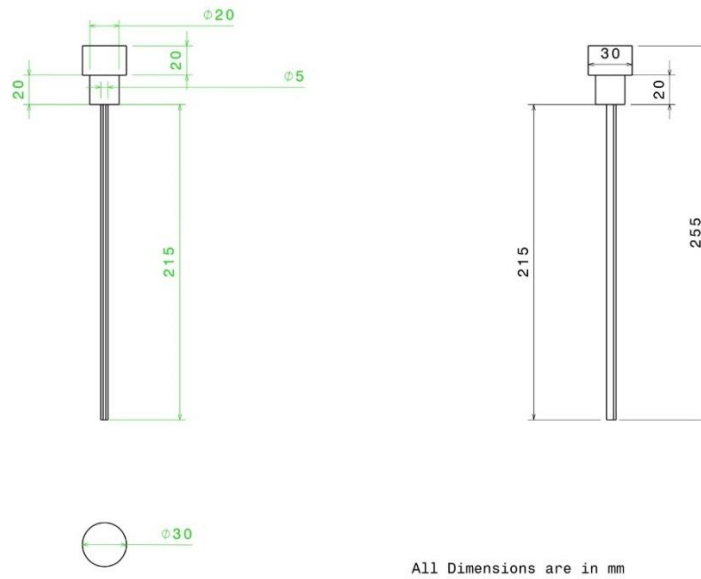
Isometric Views of Drill Screw
